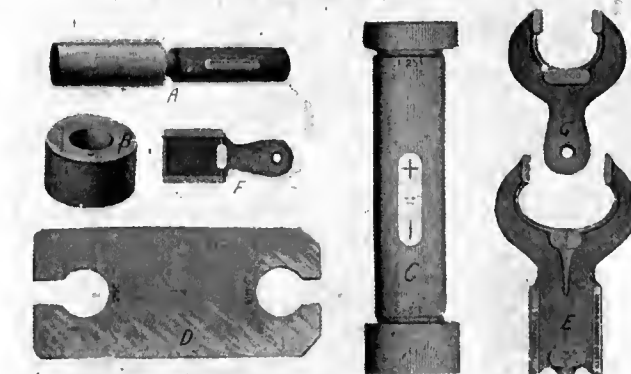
(a)—PLUG GAUGE; (b)—RING GAUGE; (c)—PLUG LIMIT GAUGE; (d)—INTERNAL LIMIT GAUGE; (e)—DOUBLE-END CALIPER GAUGE; (f)—INTERNAL CALIPER GAUGE; (g)—EXTERNAL CALIPER GAUGE.
